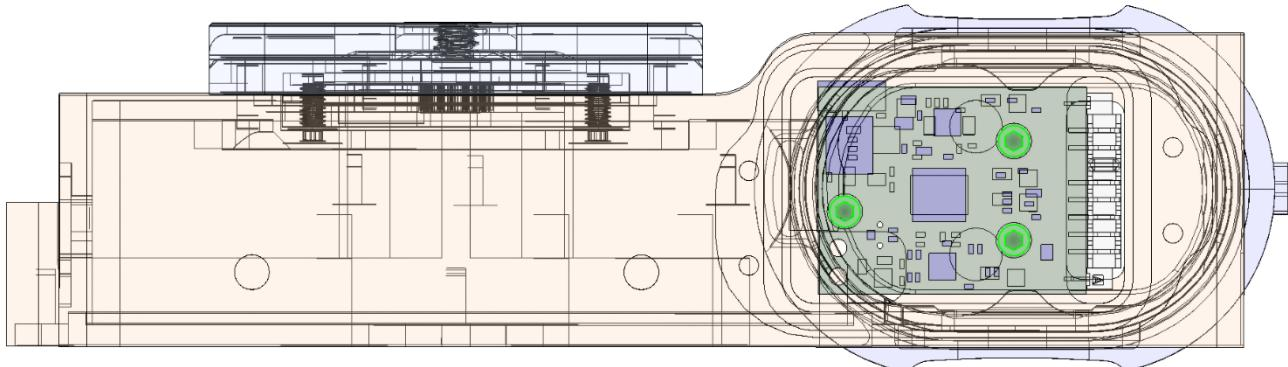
Screws (000000-00) Fastening Battery Board to Body (DWG)
